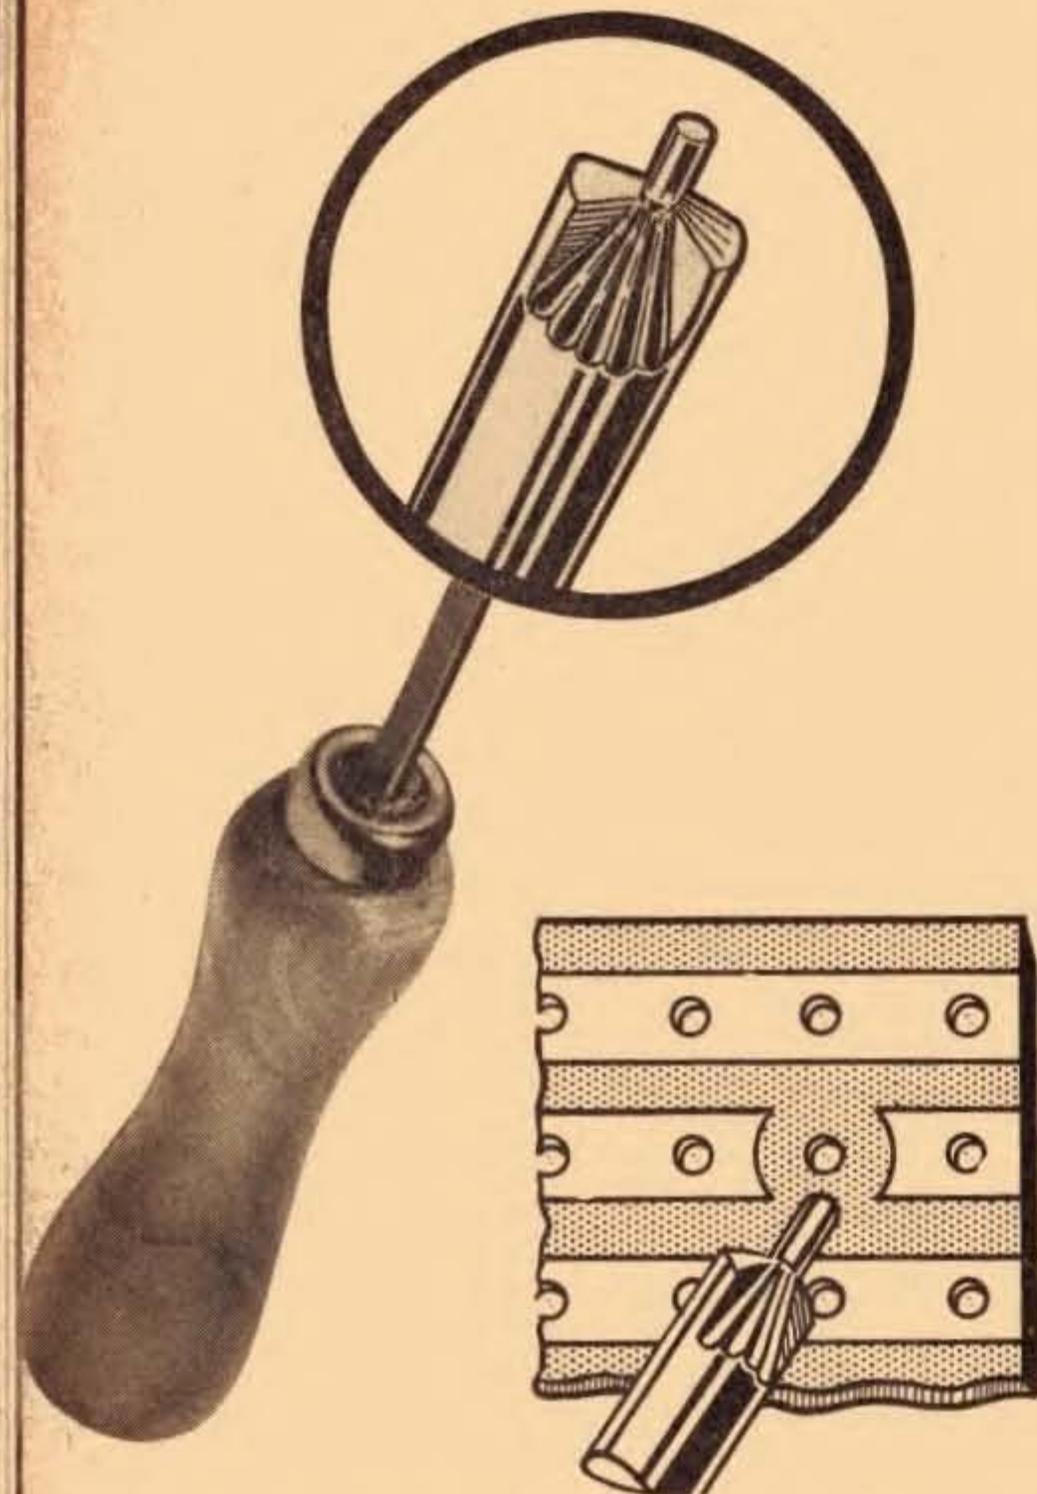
General view of the tool with an enlargement showing the details of the cutting edges. The inset drawing shows the effect of using the tool on the copper strip
